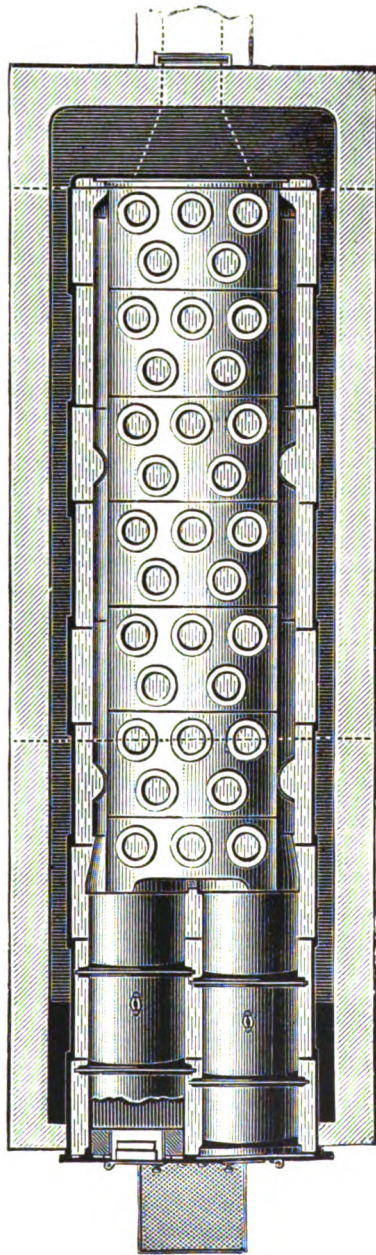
THE GALLOWAY BOILER. Plan showing Disposition of Tubes and Brickwork Bed.
